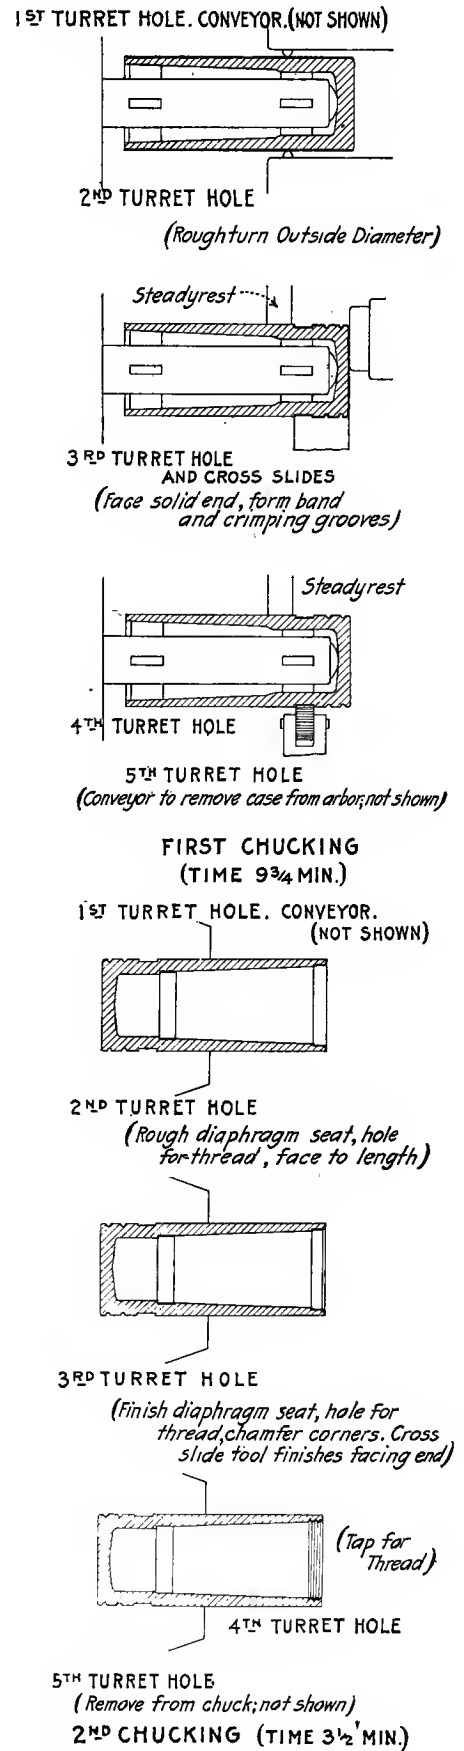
MACHINING A 3-IN. FORGED SHRAPNEL CASE
